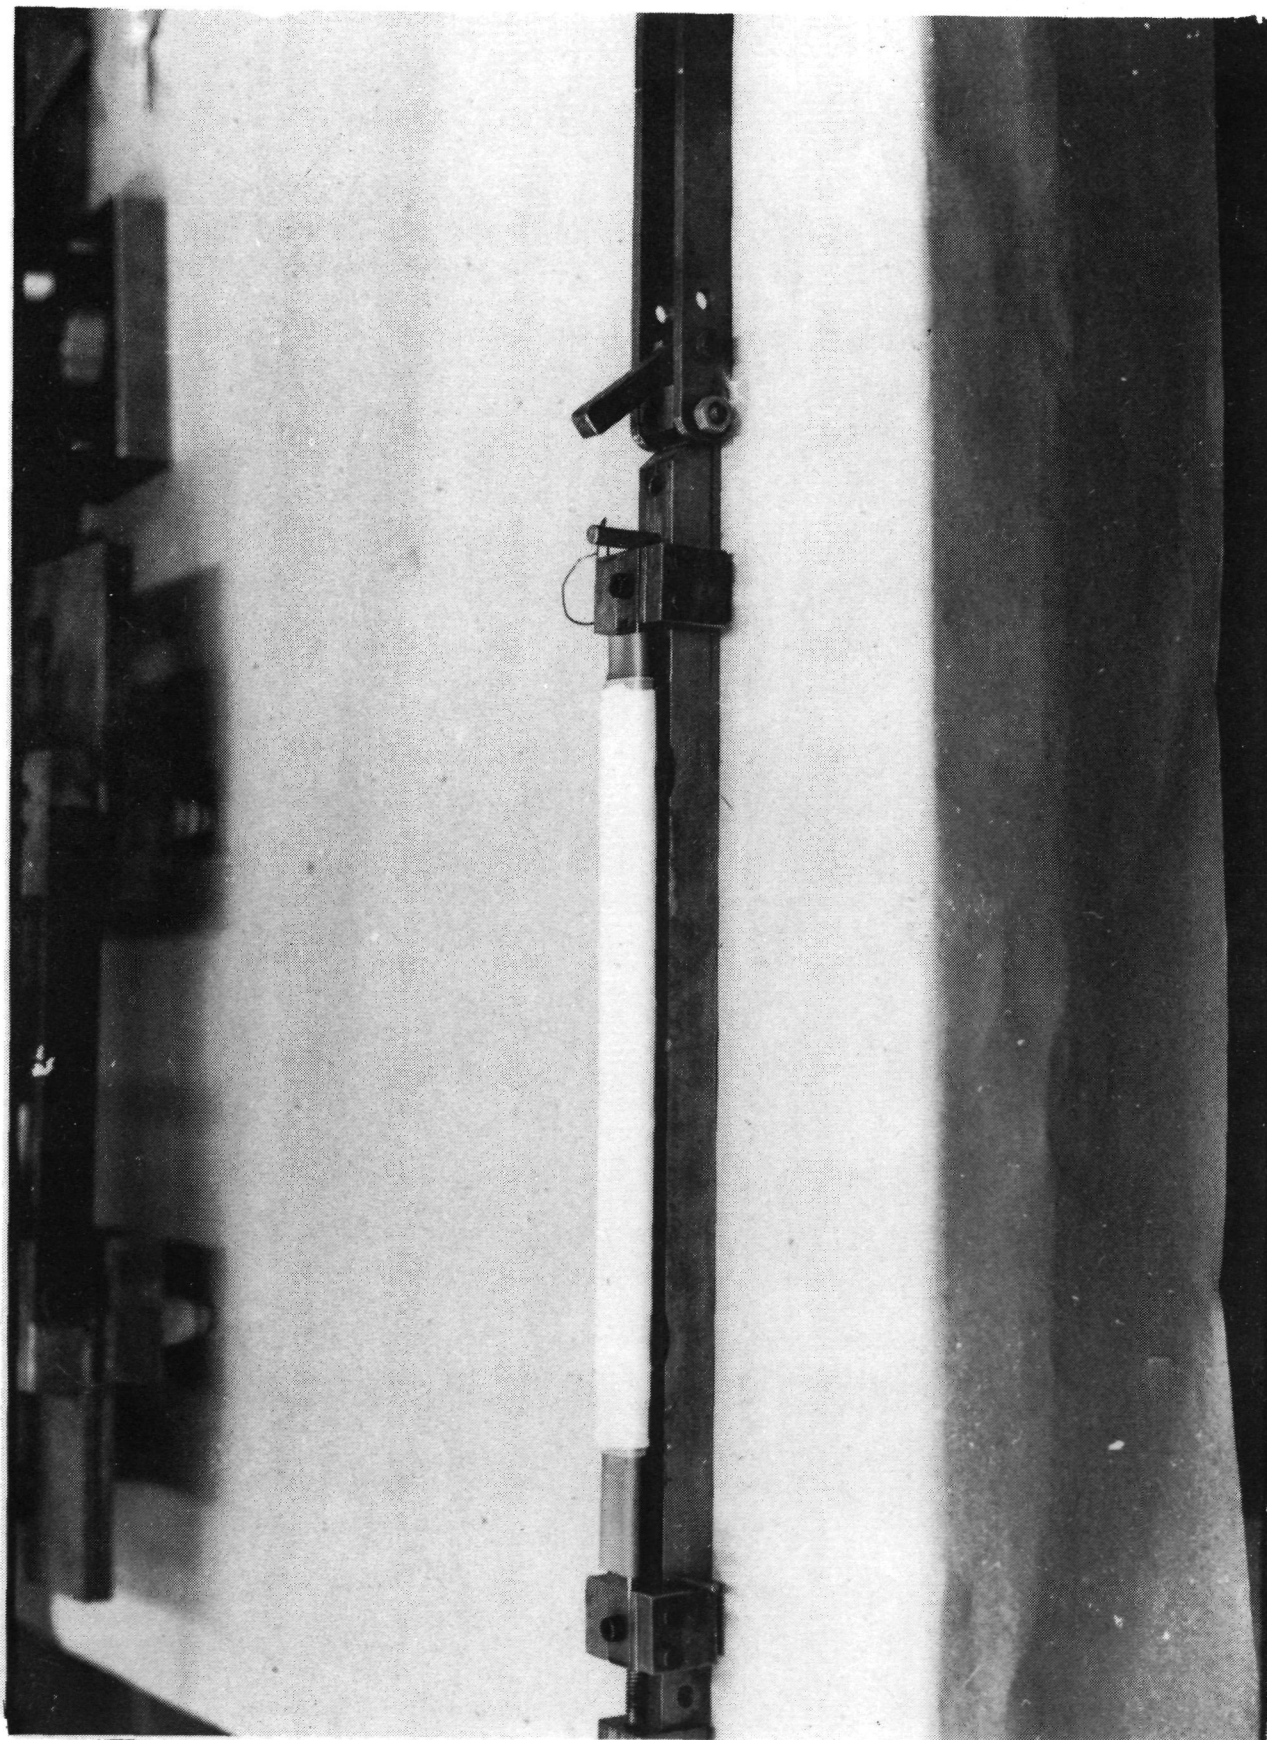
Fixture for Specimen Layout Tightening by Expanding
